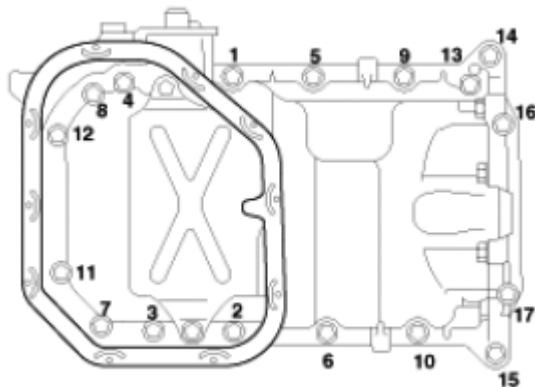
Locating Oil Pan Bolts Tightening Sequence
